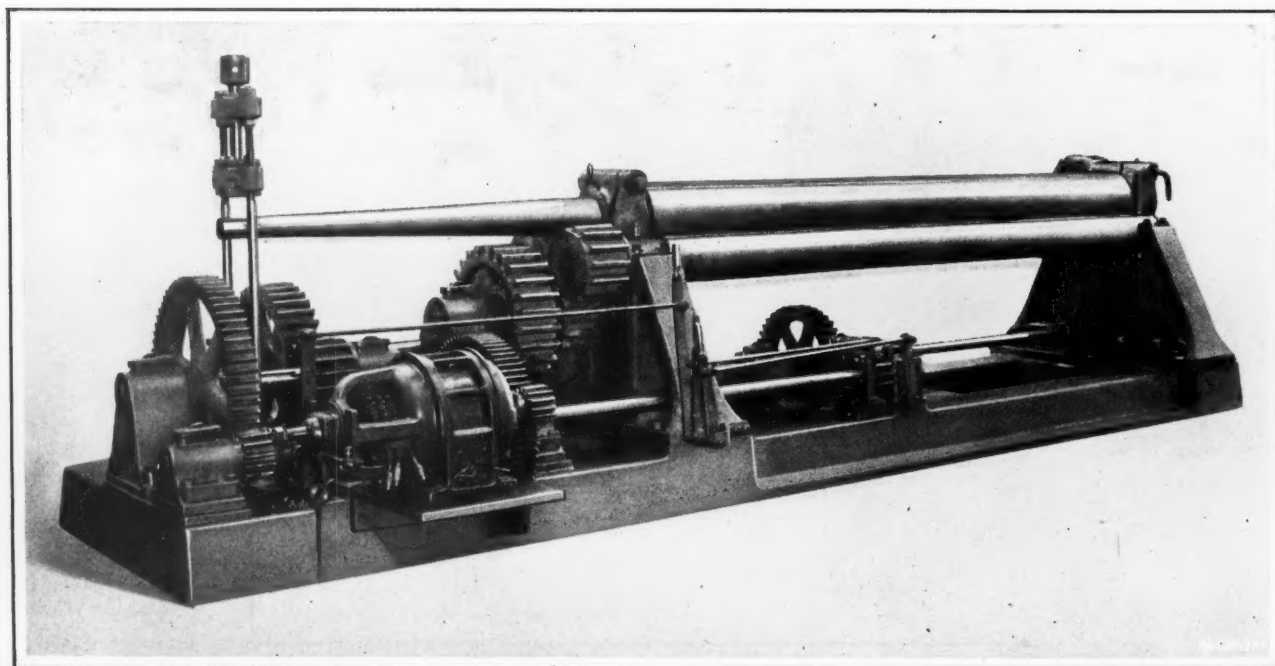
Bending Roll built by the Cleveland Punch & Shear Works Co., in which the Top Roll is raised and lowered by Power
